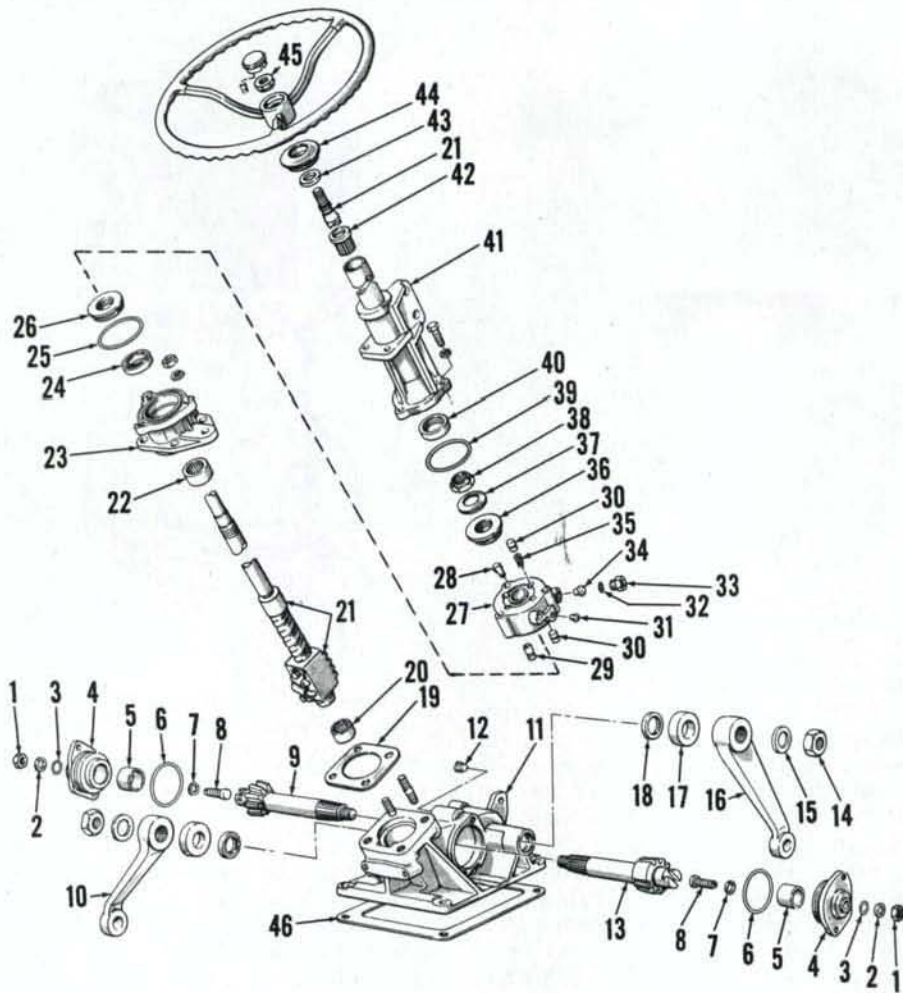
Exploded view of power steering gear and valve assembly. Turning effort on steering wheel, or reaction of front wheels through steering linkage and gears, causes wormshaft (21) to move up or down, thereby actuating the control valve (27).
